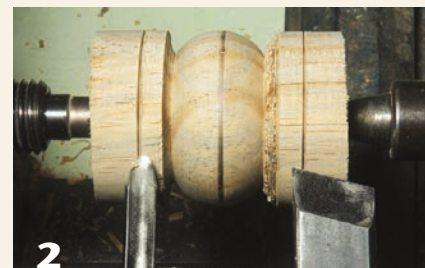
and 2 show my attempts to roll a bead into a cylindrical surface with the first two tools. What is clear is that the more rolling cuts in a series, the more the end of the last cut moves "in" towards the center of the bead. Therefore, cutting a bead into a cylindrical surface solely by making a series of rolling cuts will result in a narrower-than-designed bead of uncertain width.
